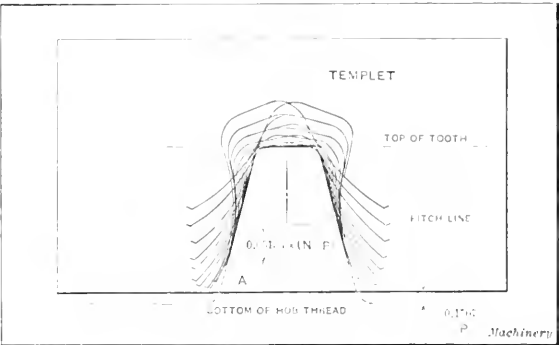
Lines scribed on the Hob Tooth Templet from a Hobbed Gear
